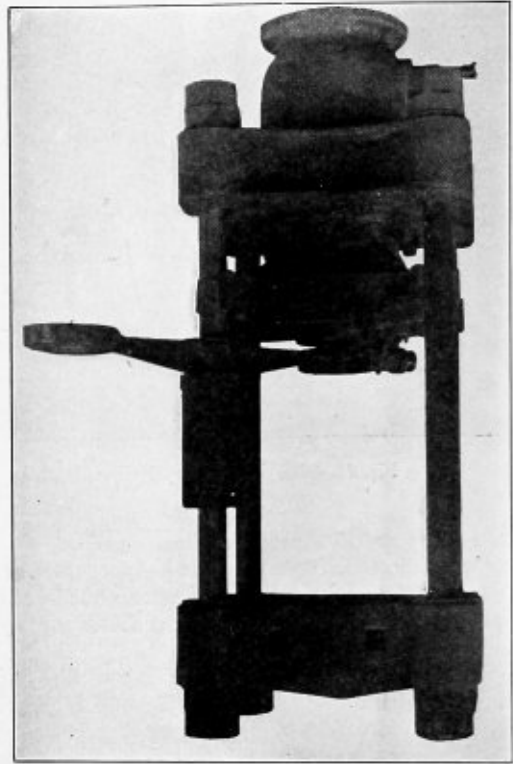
150-Ton Forming Press with Revolving Die Holder for Nosing Steel Shells
